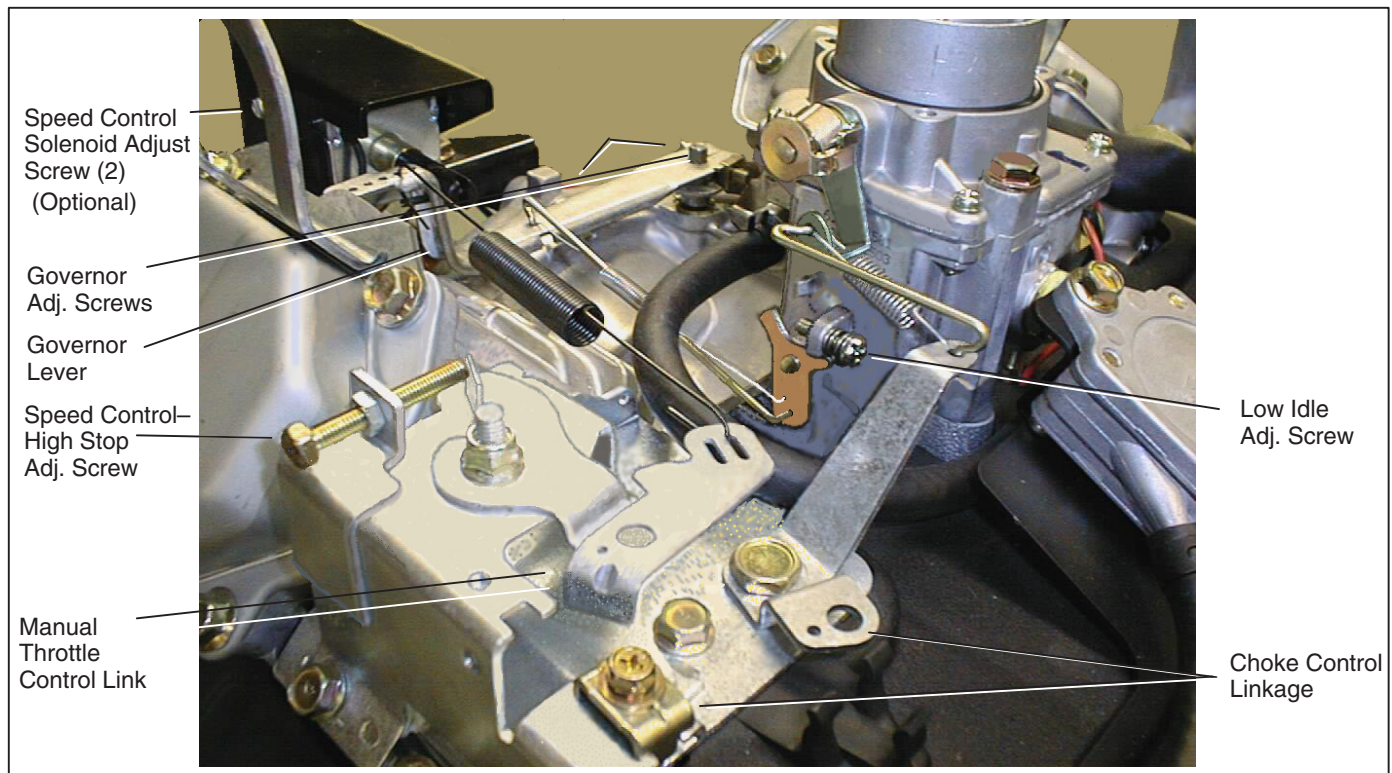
GOVERNOR AND SPEED CONTROL ASSEMBLY
